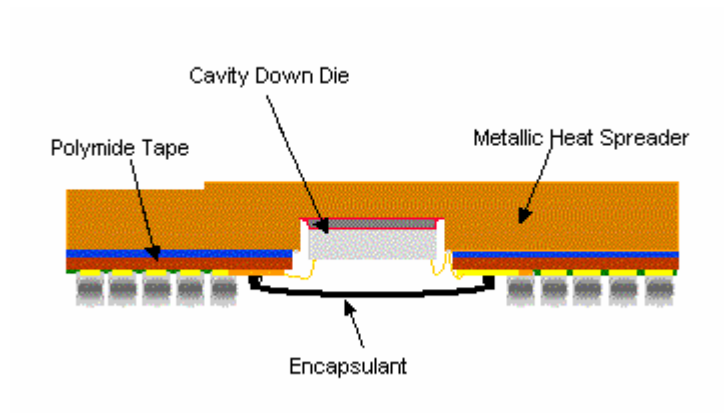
Cross-Sectional View of Flex-BGA Package
